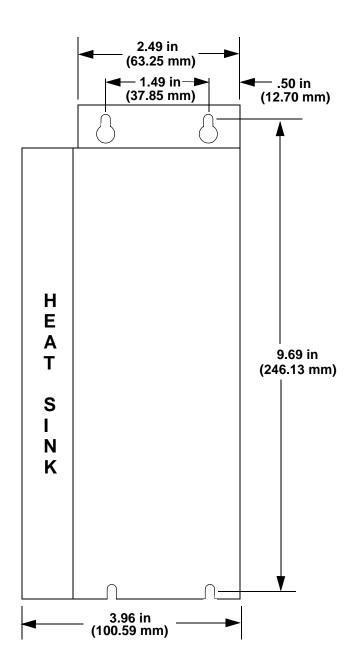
1, 2, and 3 kW Narrow Drive (-DN) - Front View
